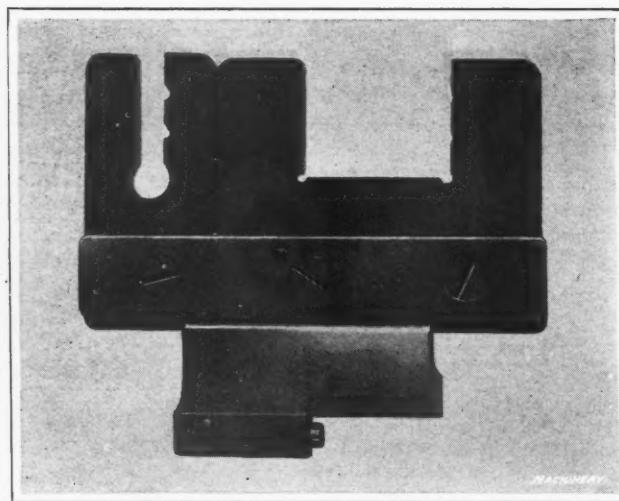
Example of a Built-up Gage which combines a Flush-pin Gage with Snap Gages
